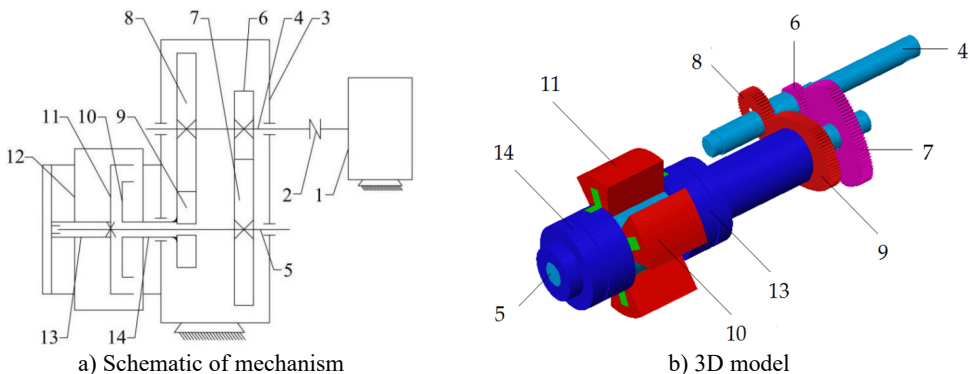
Diagram of the pump: 1 – motor; 2 – clutch; 3 – gearbox; 4 – input shaft; 5 – out shaft;
